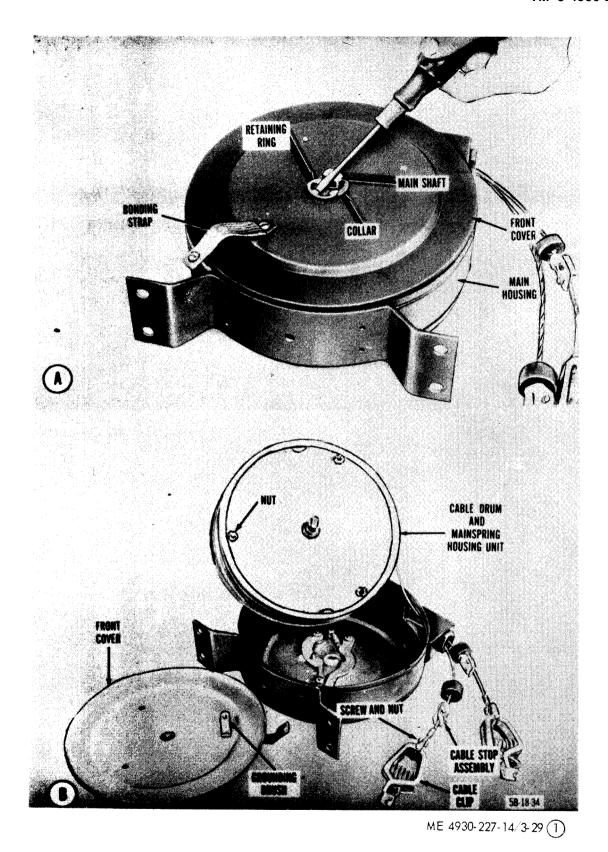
(1). Ground reel, disassembly and reassembly.
